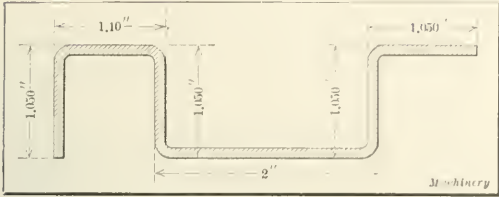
Cross-section of Sheet Metal Bend dimensioned according to Old Method
